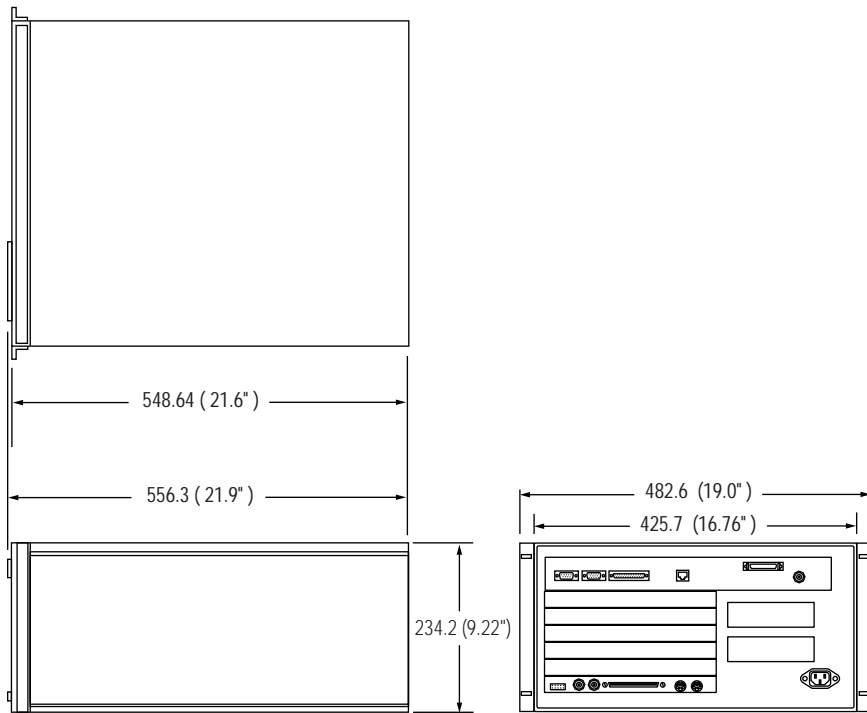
HP 16700A and 16701A exterior dimensions. Dimensions: mm (inches).
